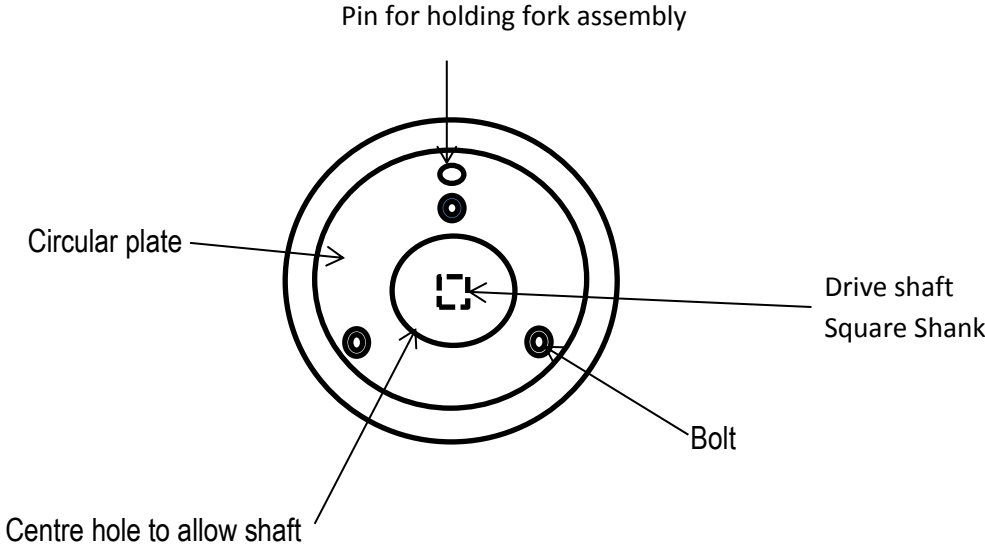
Front view of a DFH₂ Circular plate with a drive shaft
